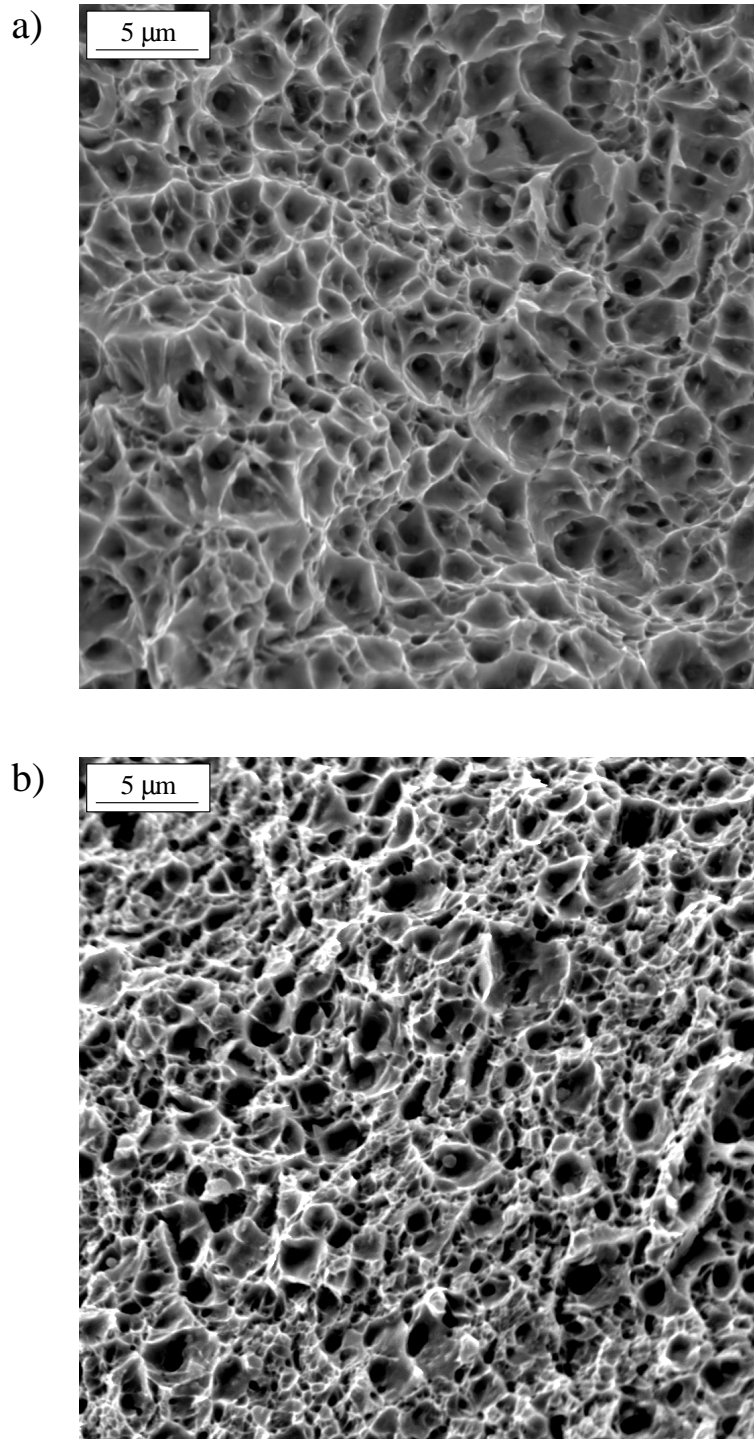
Tensile fracture surfaces of H7 in the (a) ‘as-welded’ condition and (b) after 1 hour at 500 °C.
